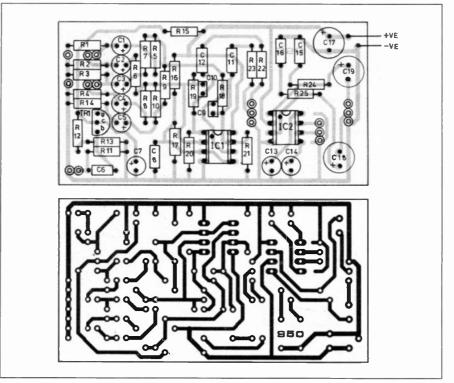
Component layout and full size copper foil track master for the printed circuit
